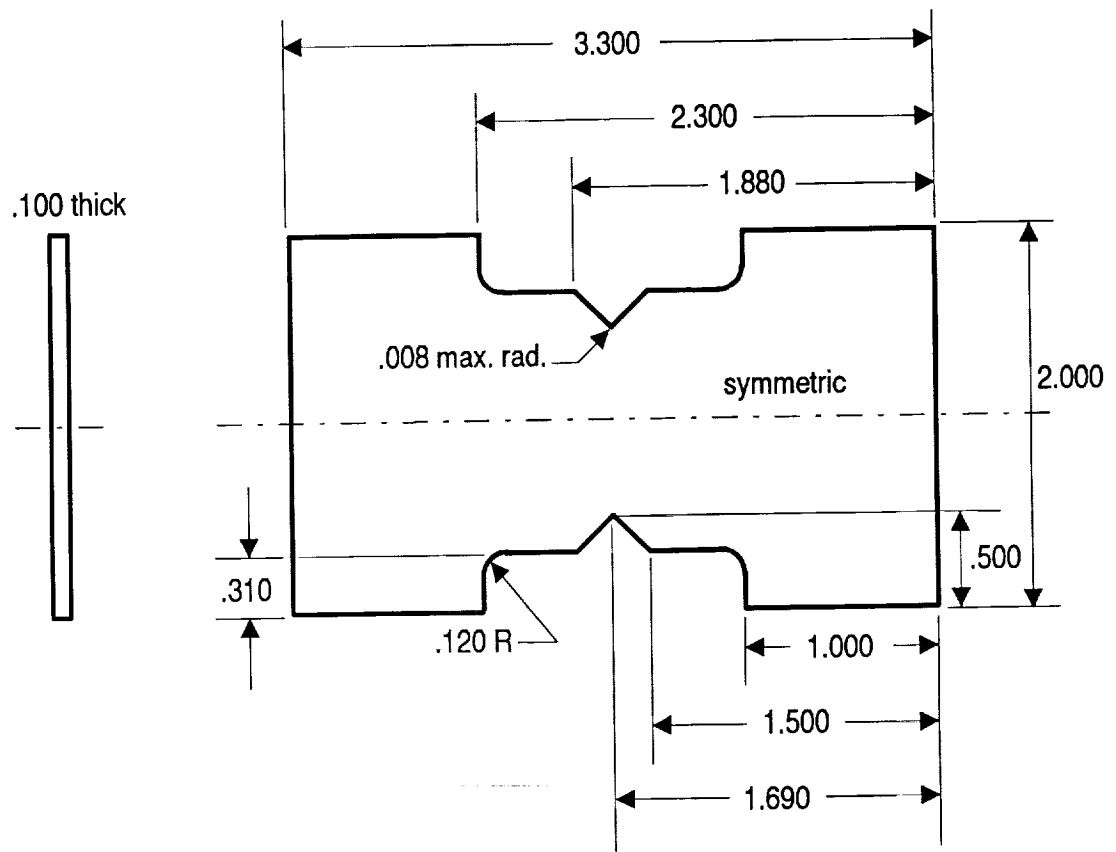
Full scale schematic diagram showing the geometry and dimensions of the shear specimens.
